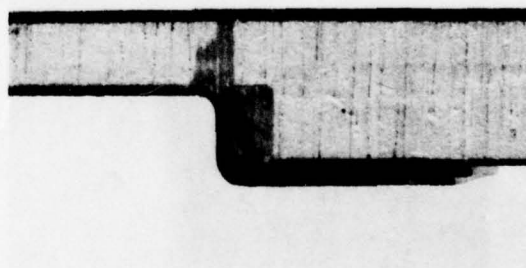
Cross-section over balsa wood core sandwich floorpanel.
